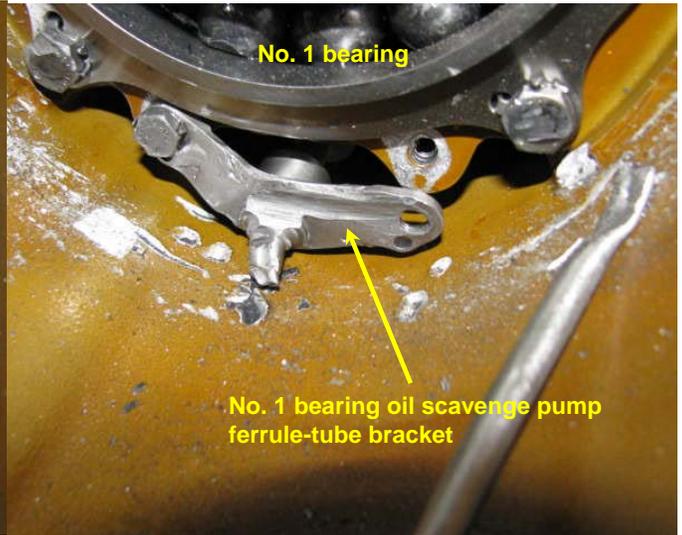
Damaged and detached oil scavenge pump ferrule-tube bracket
